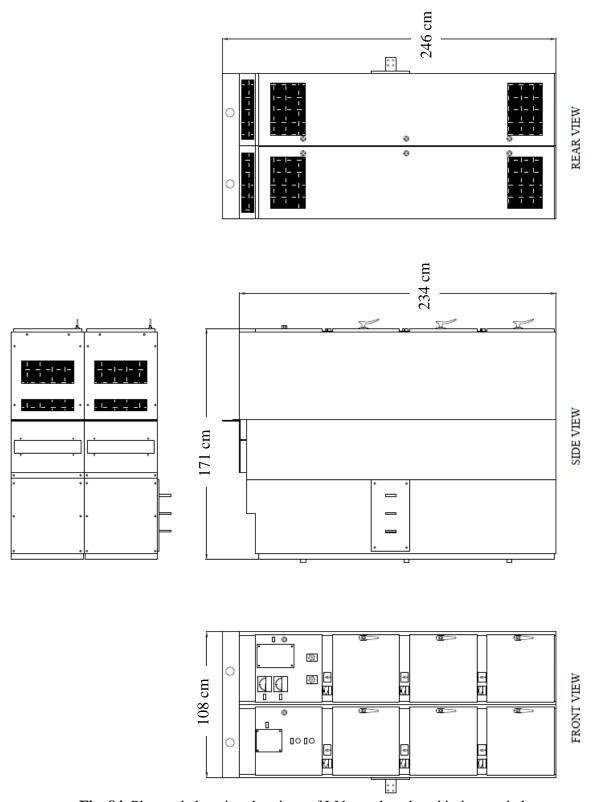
Plan and elevation drawings of LV metal enclosed indoor switchgear.
